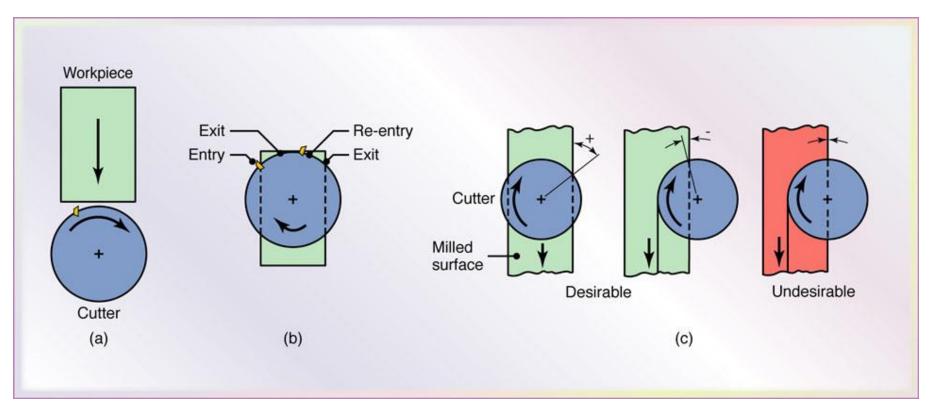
(a) Relative position of the cutter and insert as it first engages the workpiece in face milling.
